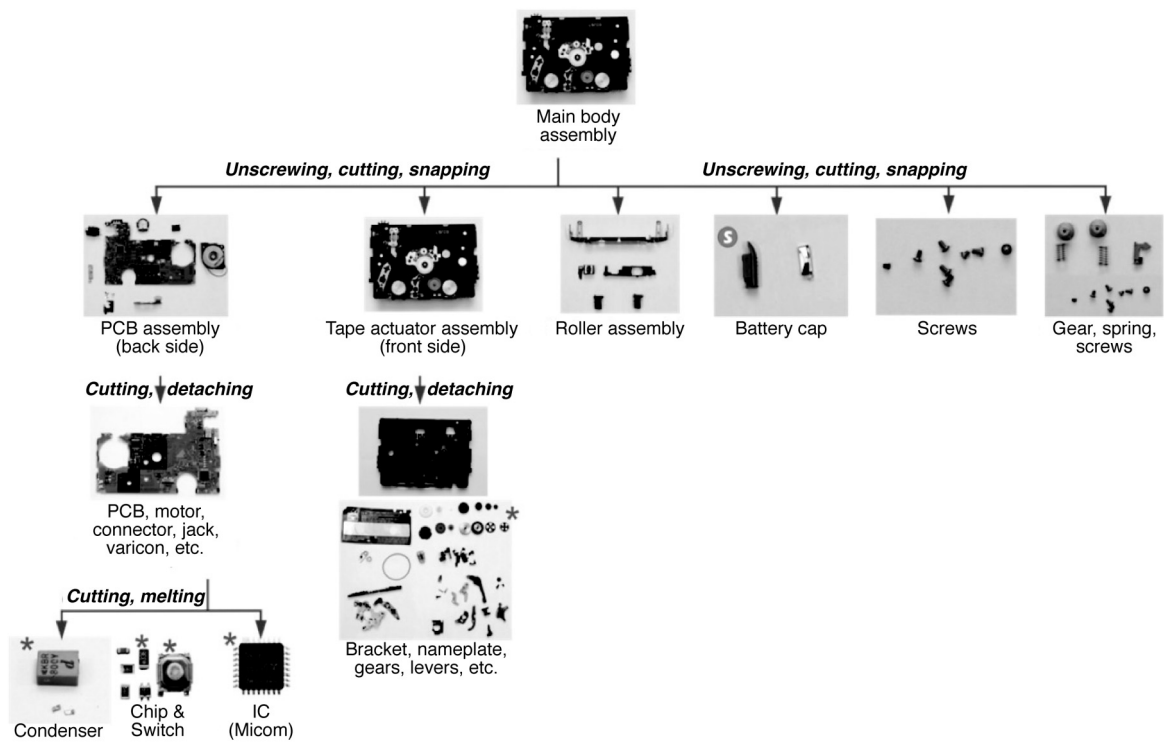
Example of disassembly into subparts and subassembly (KOECO, 2007)
